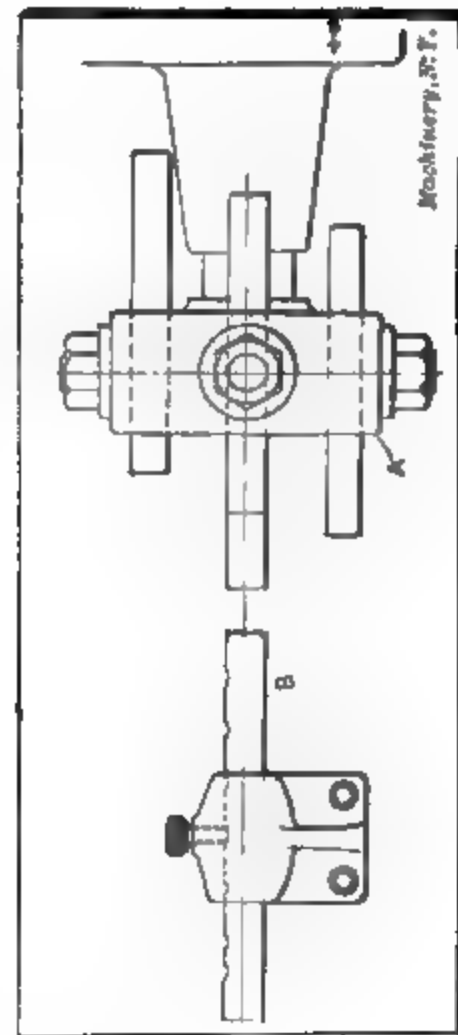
Rotating Dead Stops used on a Turret Lathe Cross-slide
